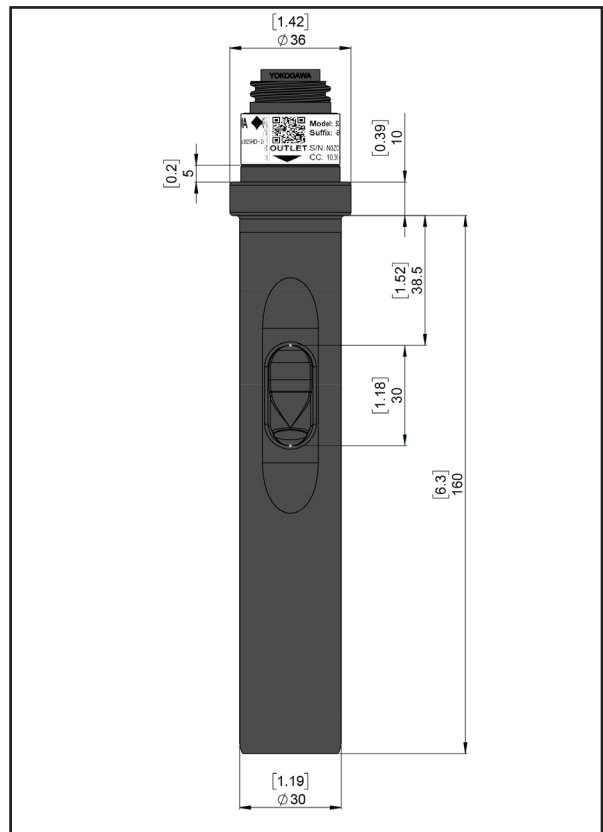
Dimensions of SC42 EP16/EK16 (in mm [inches])
